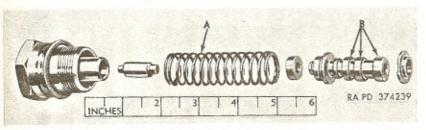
Repair and rebuild standard points of measurement for transmission oil pressure regulator valve.
